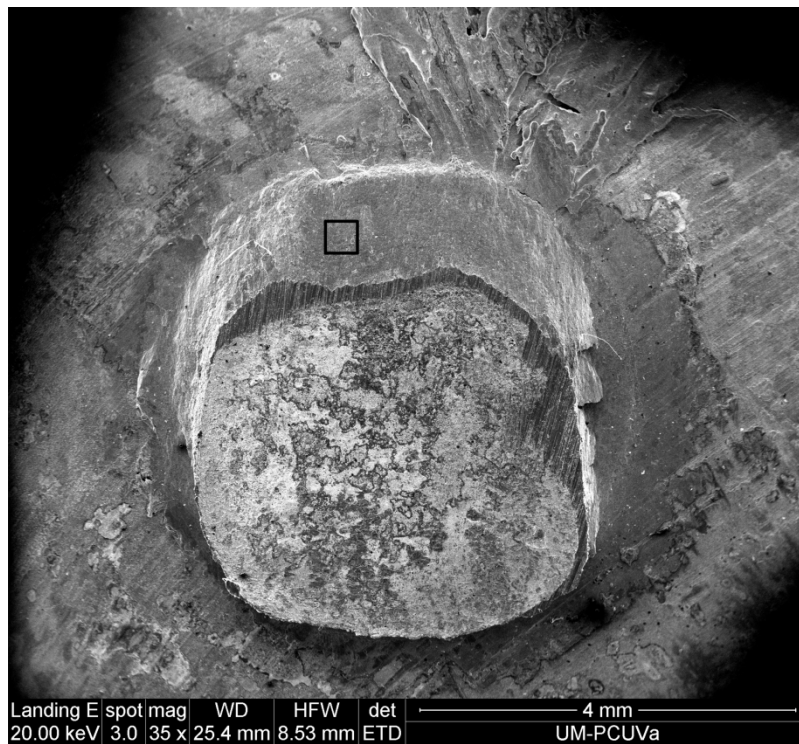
SEM macrograph that shows the fracture of the tensile shear test specimen No. 2.
